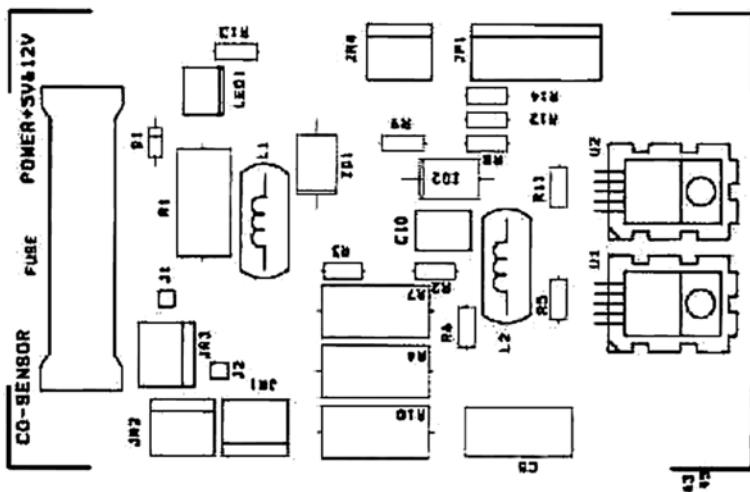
PCB component layout (*top*) of power supply part of CO-monitoring device
